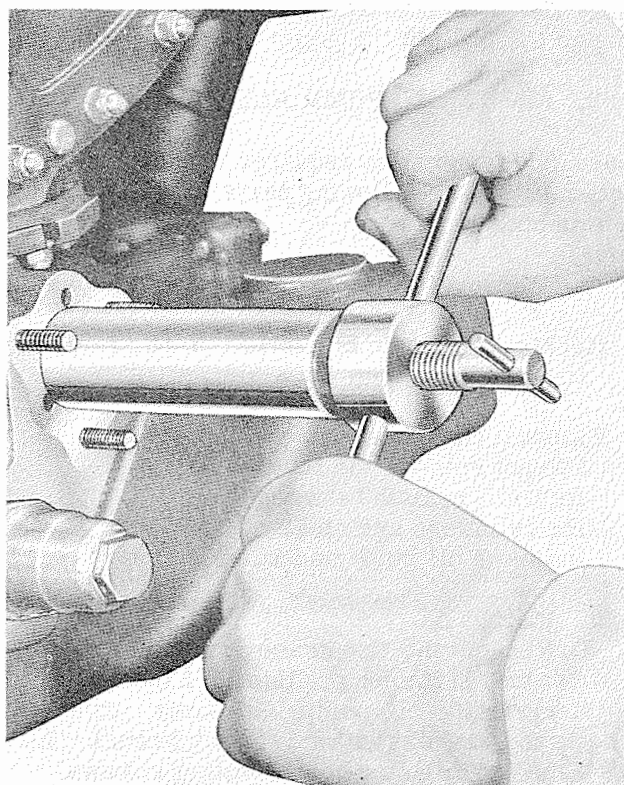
Removing Supercharger Clutch Oil Control Valve Sleeve
